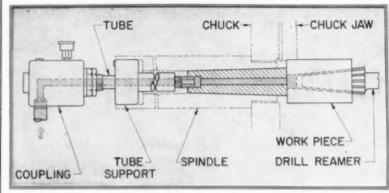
Application of coolant through machine spindle can be employed on jobs such as the machining of castings or forgings having cored holes.
